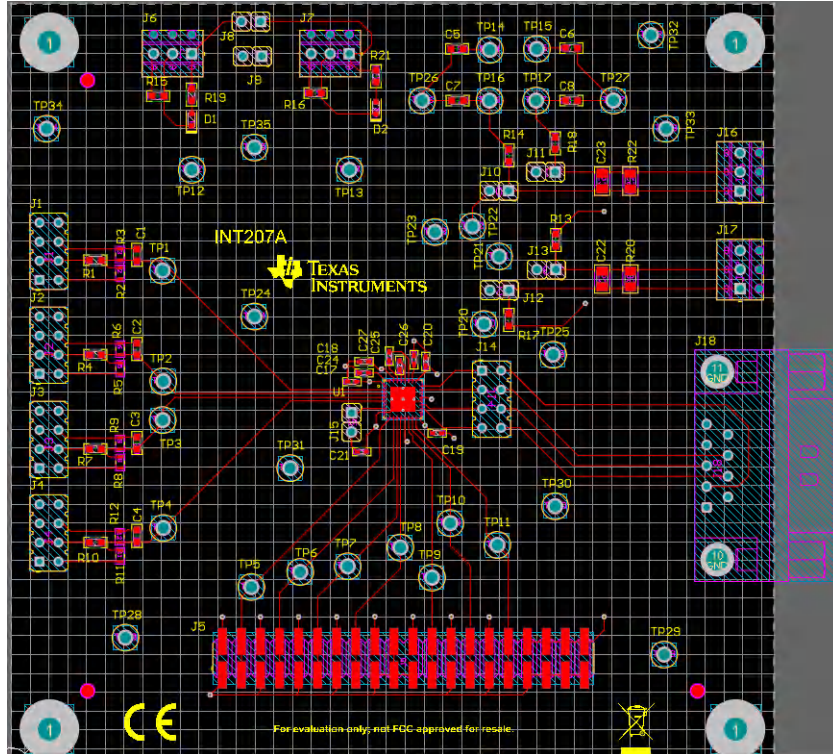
THVD4421EVM - Top Layer 2D PCB Layout
